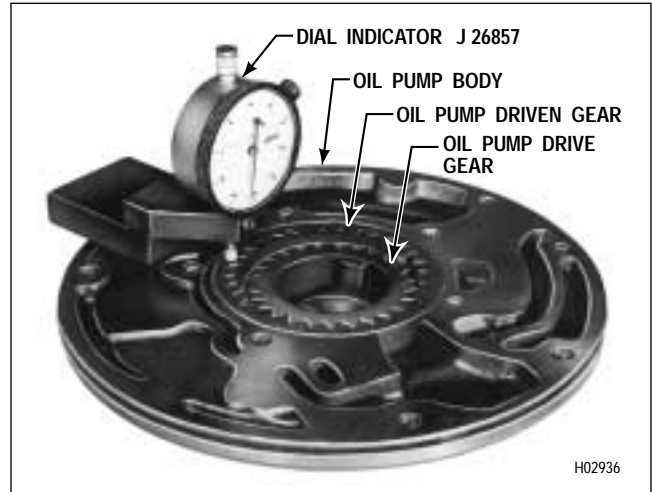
Dial Indicator Check of Oil Pump Driven Gear End Clearance
